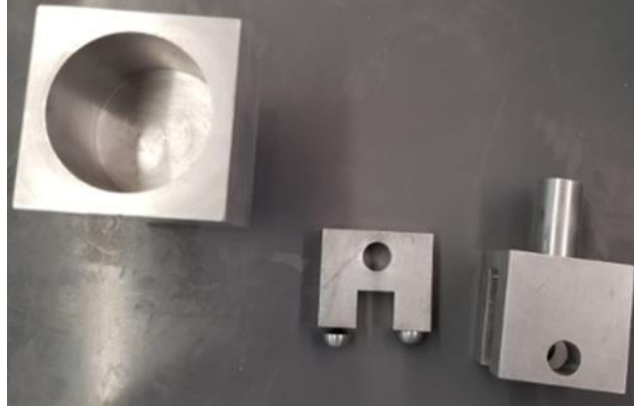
Test Tools Designed and ready for Assembly onto Test Resources for Experiment.
